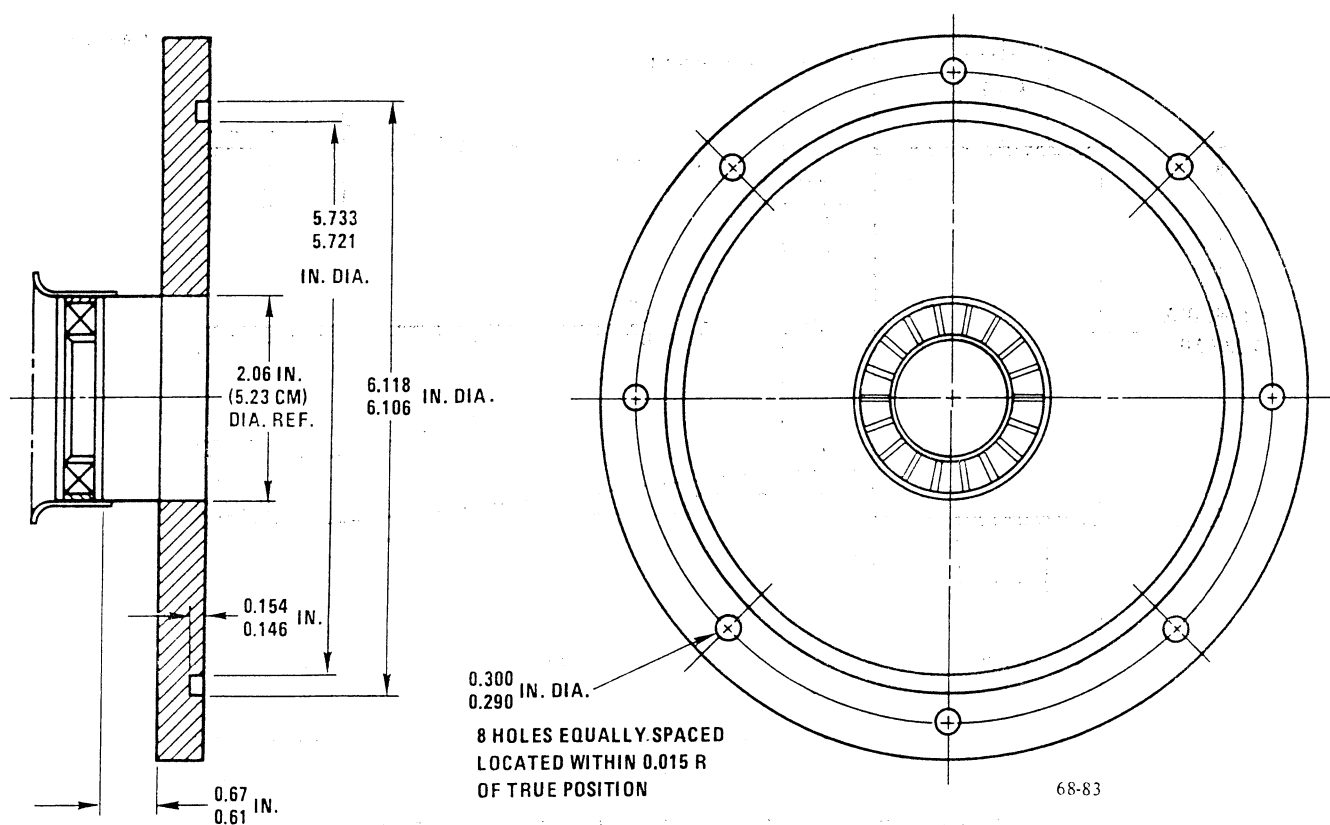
A. Configuration 1 - Recessed Air Swirler Assembly
